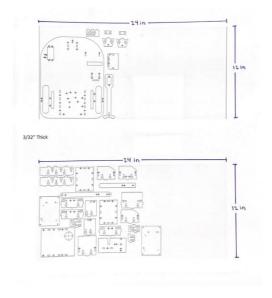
SolidWorks Layout of All Laser Cut pieces for Final Product
